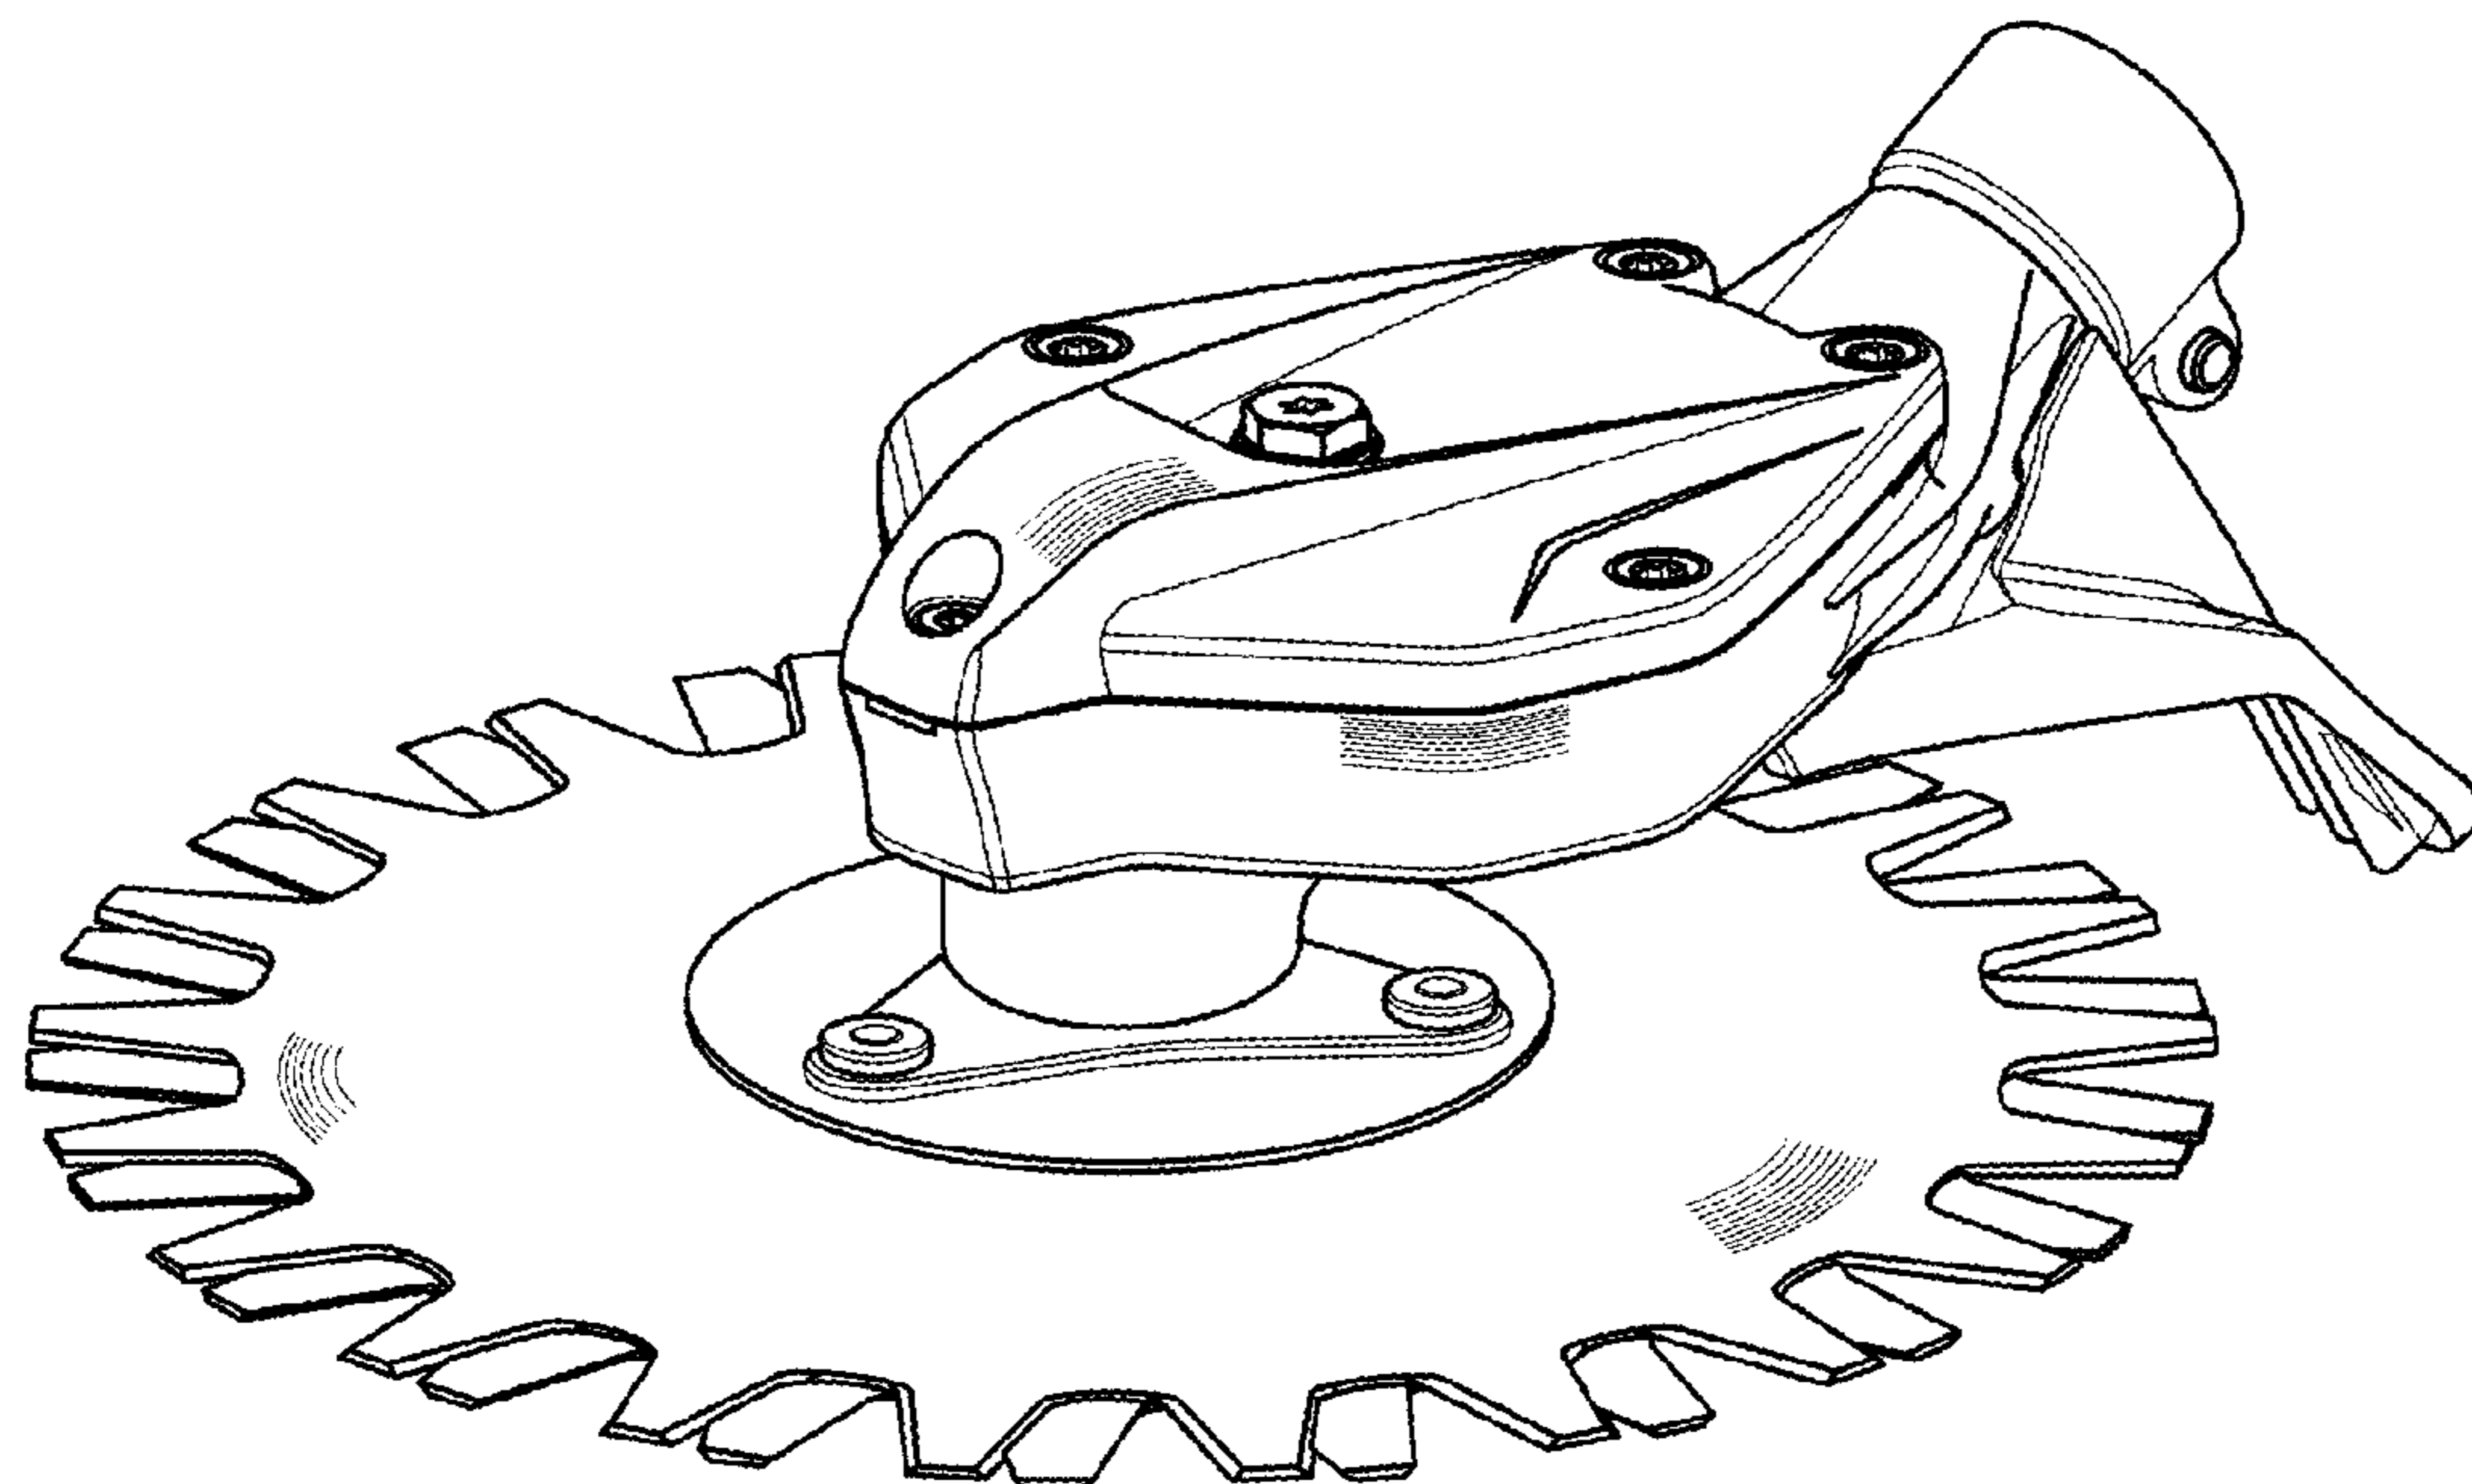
is a right-front perspective view of the reciprocating cutting tool showing my new design;
